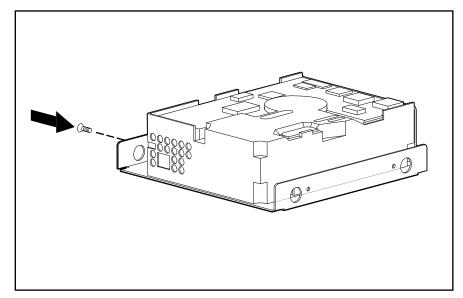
Installing the Guide Screws in the Drive Bracket
